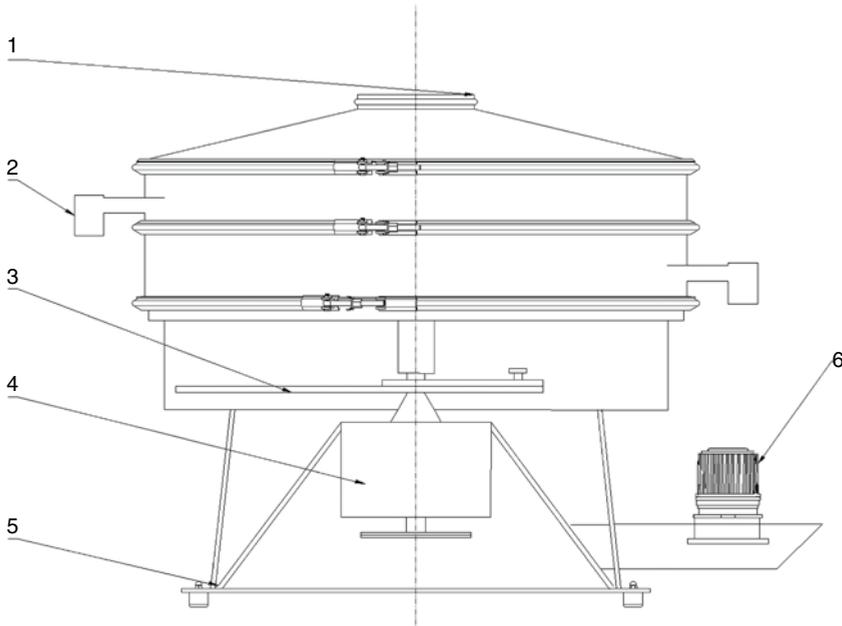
Round shaking screen. 1 – Feed inlet; 2 – discharge port; 3 – swing body; 4 – main pivot assembly; 5 – shelf; 6 – drive device.
